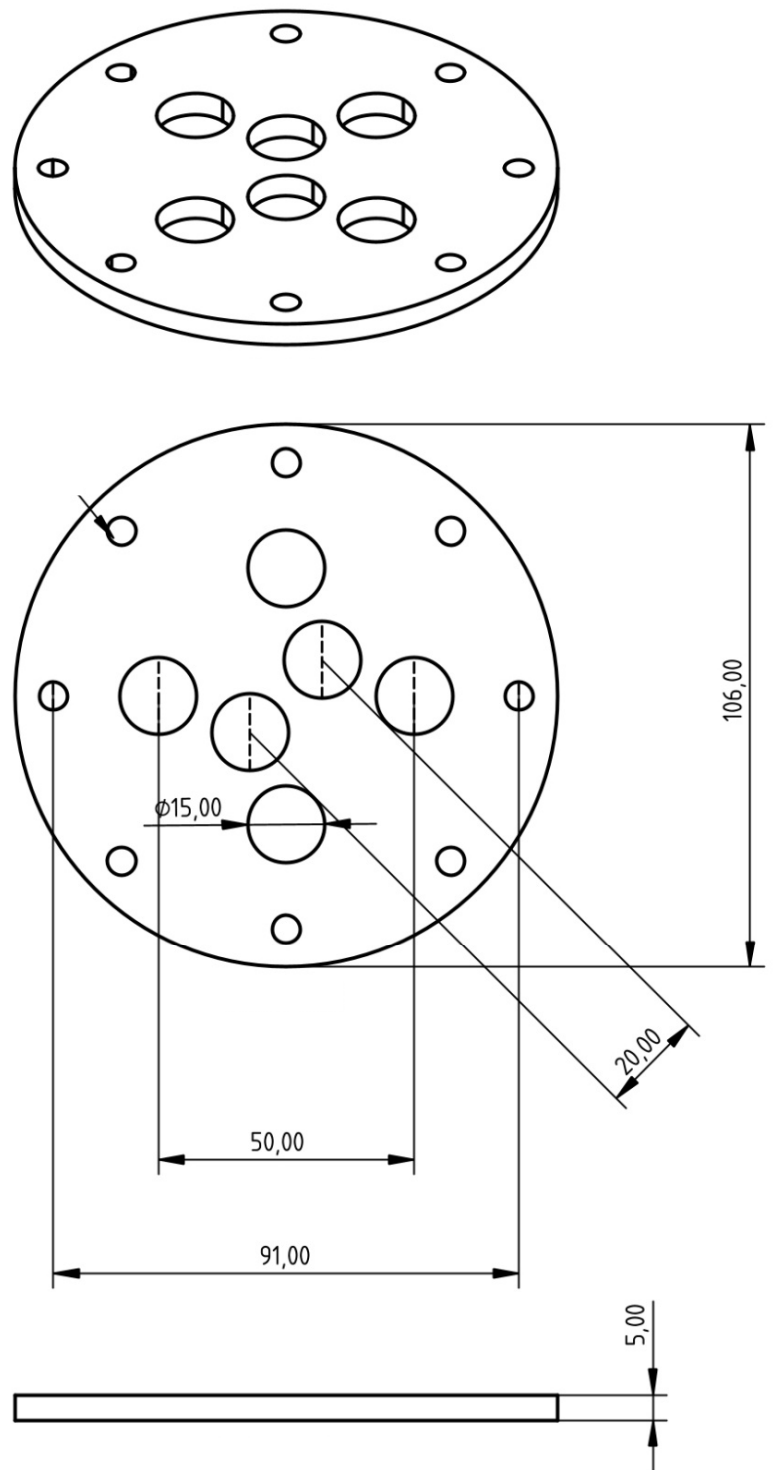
Technical drawings of the cover of the process control module with an oblique front view (top), top view (middle), and side view (bottom). Dimensions in millimeters.
